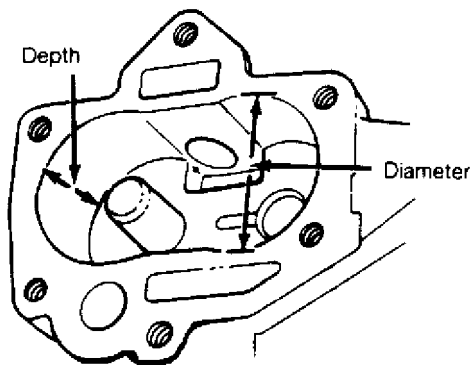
Measuring Oil Pump Gear Cavity - Typical
